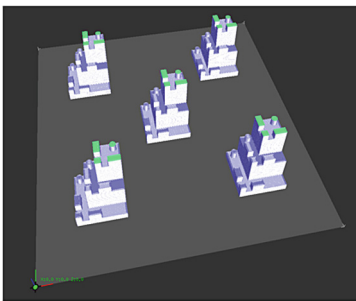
Positioning of test specimen on print platform of Bolt (B) and zMorph (Z)
